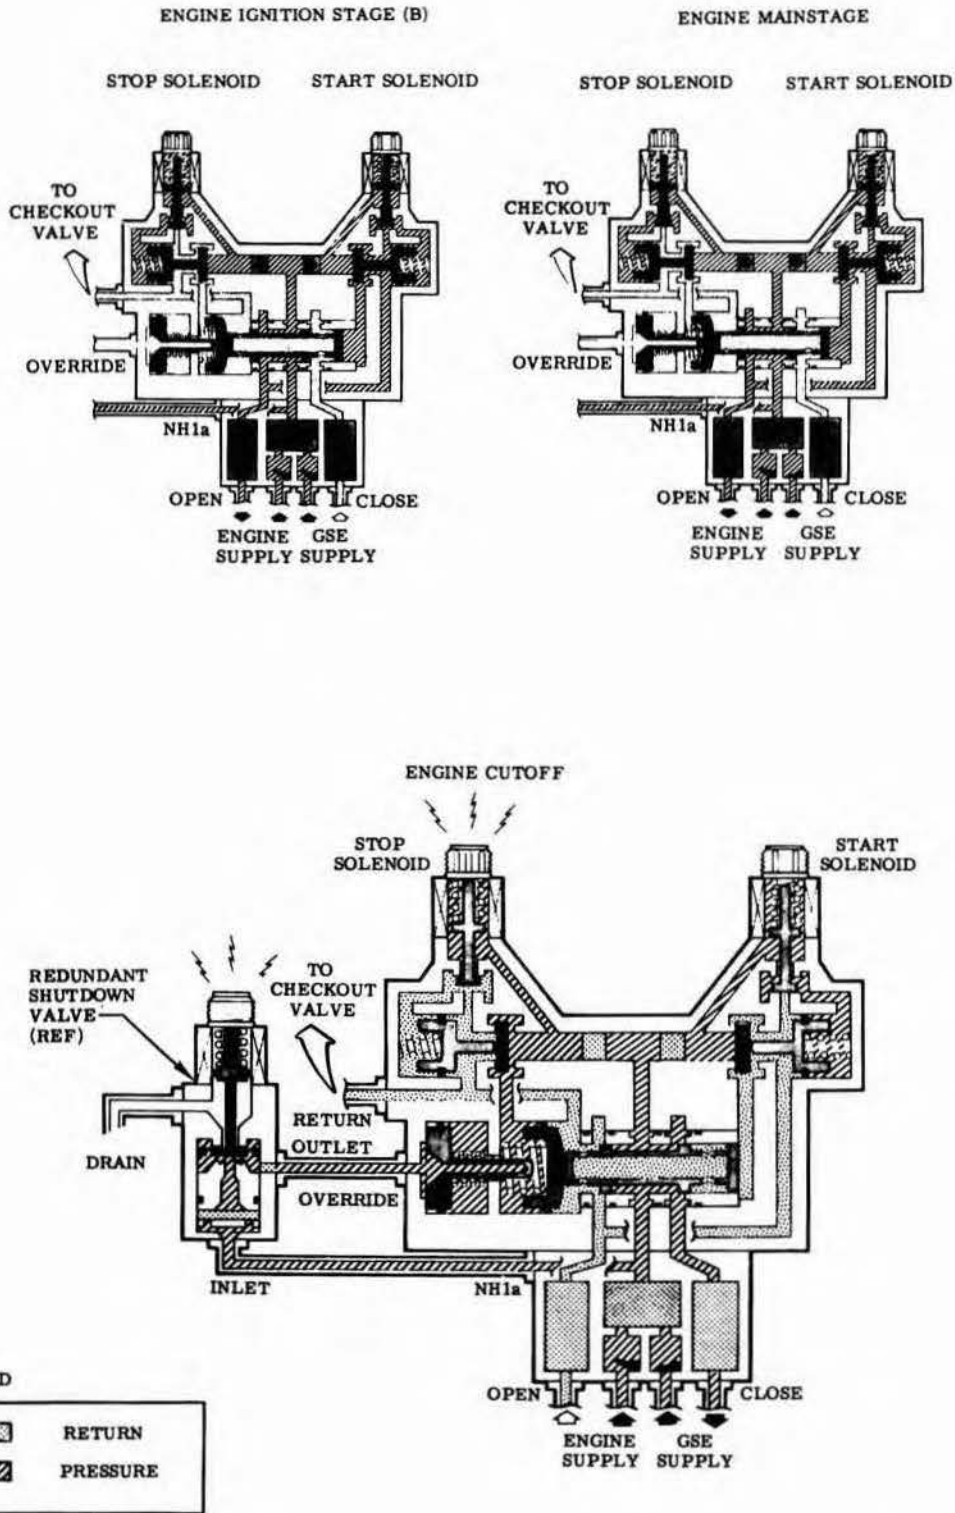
Engine Control Valve and Redundant Shutdown Valve Schematic (Sheet 1 of 2)
